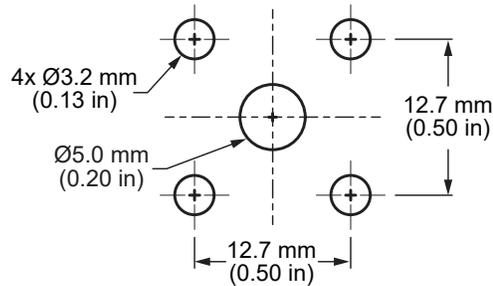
Recommended Mounting Dimensions for the CONN002-W Connector
